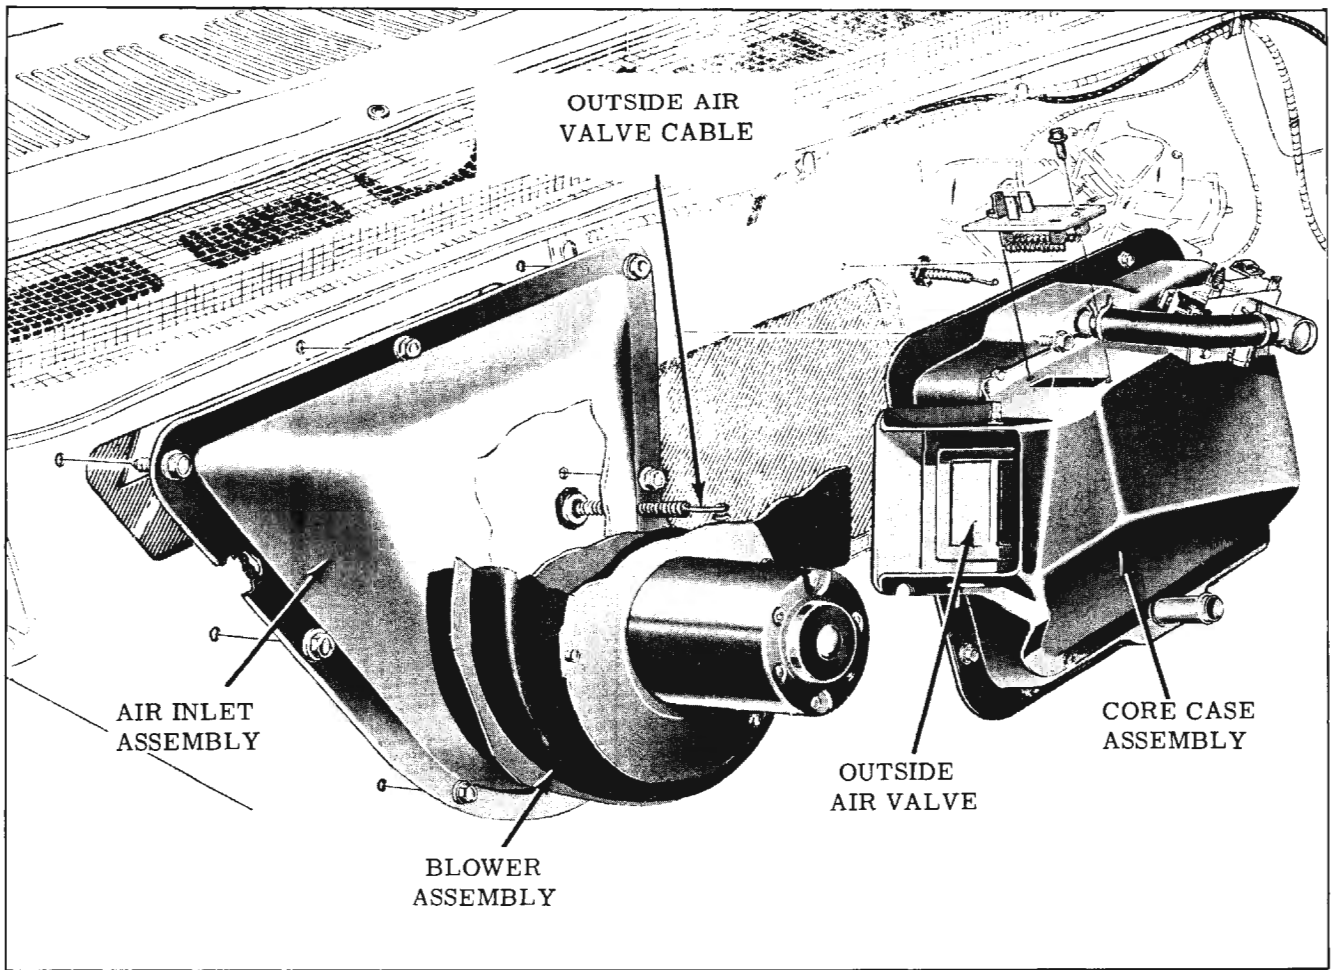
Blower, Air Inlet Assembly, Valve Body and Heater Core Assembly
